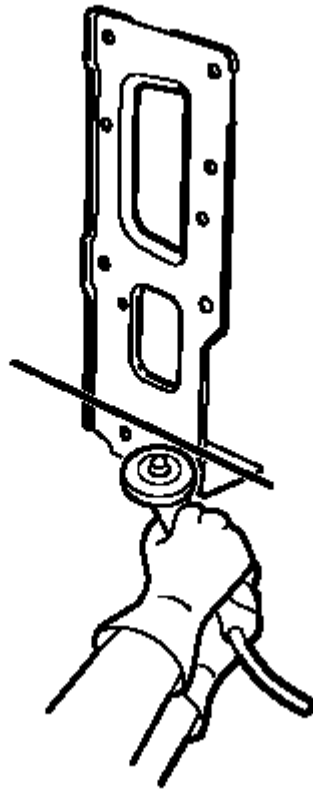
Cutting Drivetrain And Front Suspension Frame Front Support
